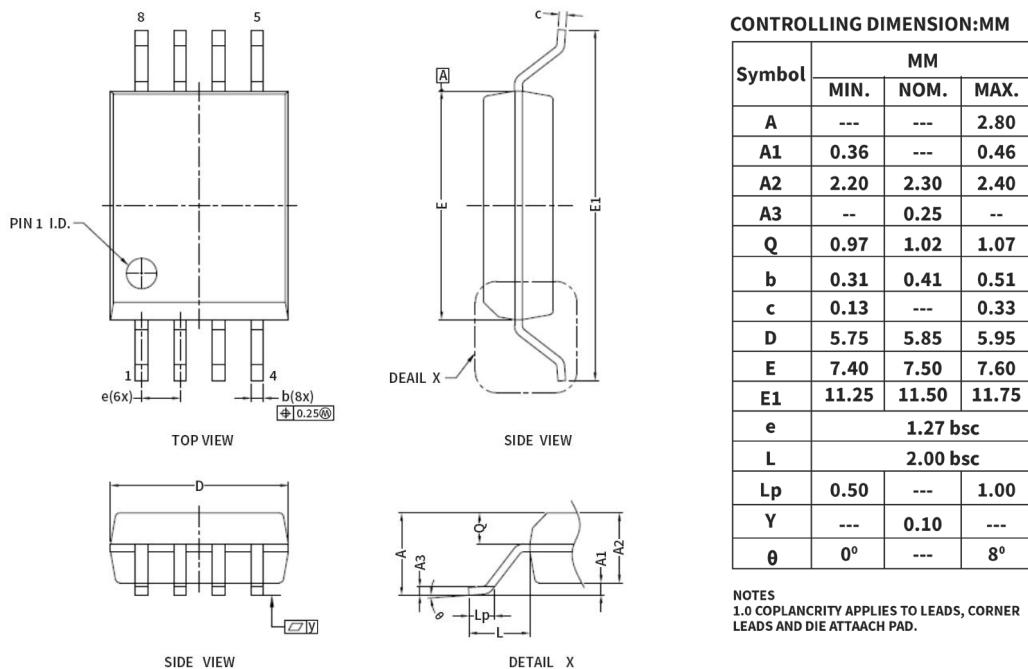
SOP8(300mil) Package Shape and Dimension in millimeters
